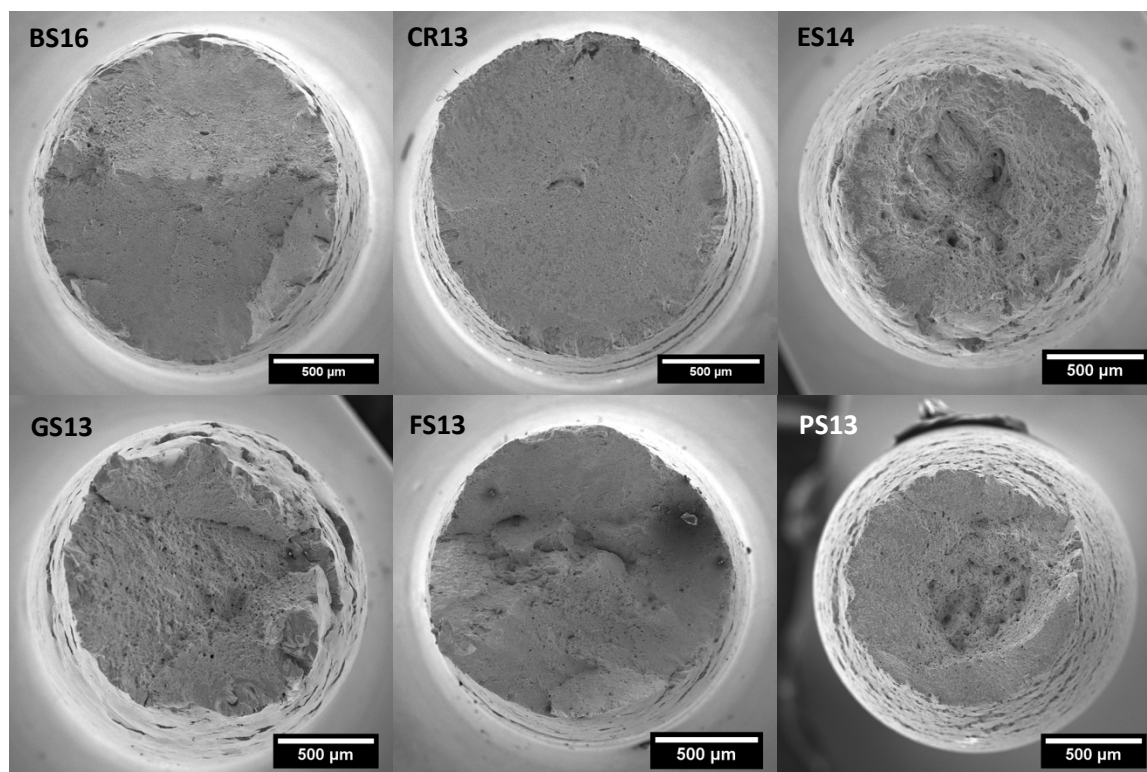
Fracture surfaces of samples strained to failure during CERT tests.
